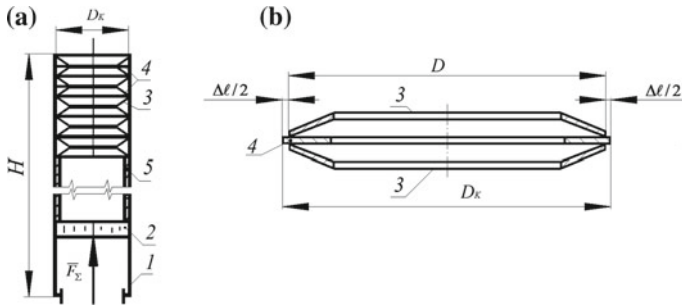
Proposed pneumatic spring with Belleville springs: 1—cylinder; 2—piston; 3—Belleville springs; 4—shim; and 5—sleeve
